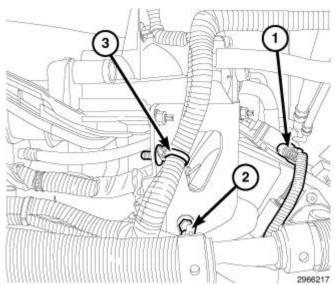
Oil Cooler Adapter Assembly Courtesy of CHRYSLER GROUP, LLC
